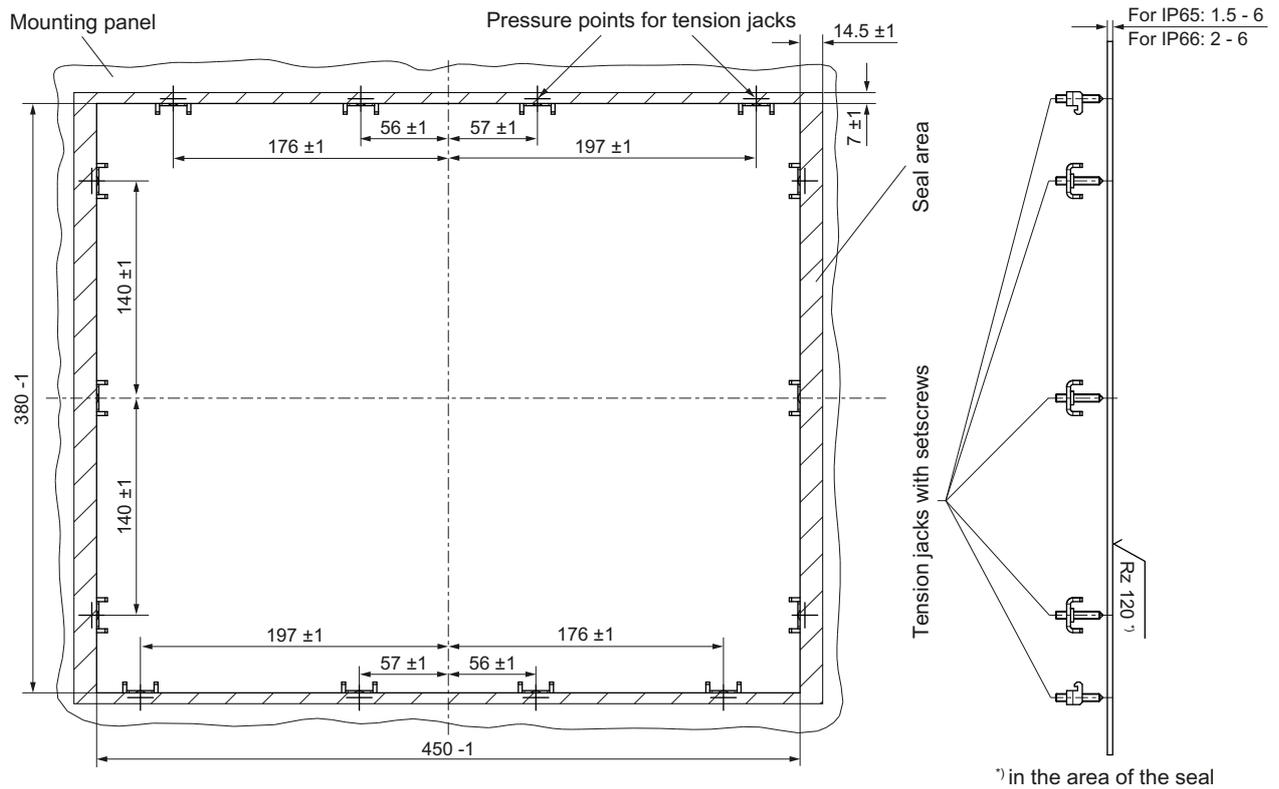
Dimension drawing for installing the OP 019 operator panel front
